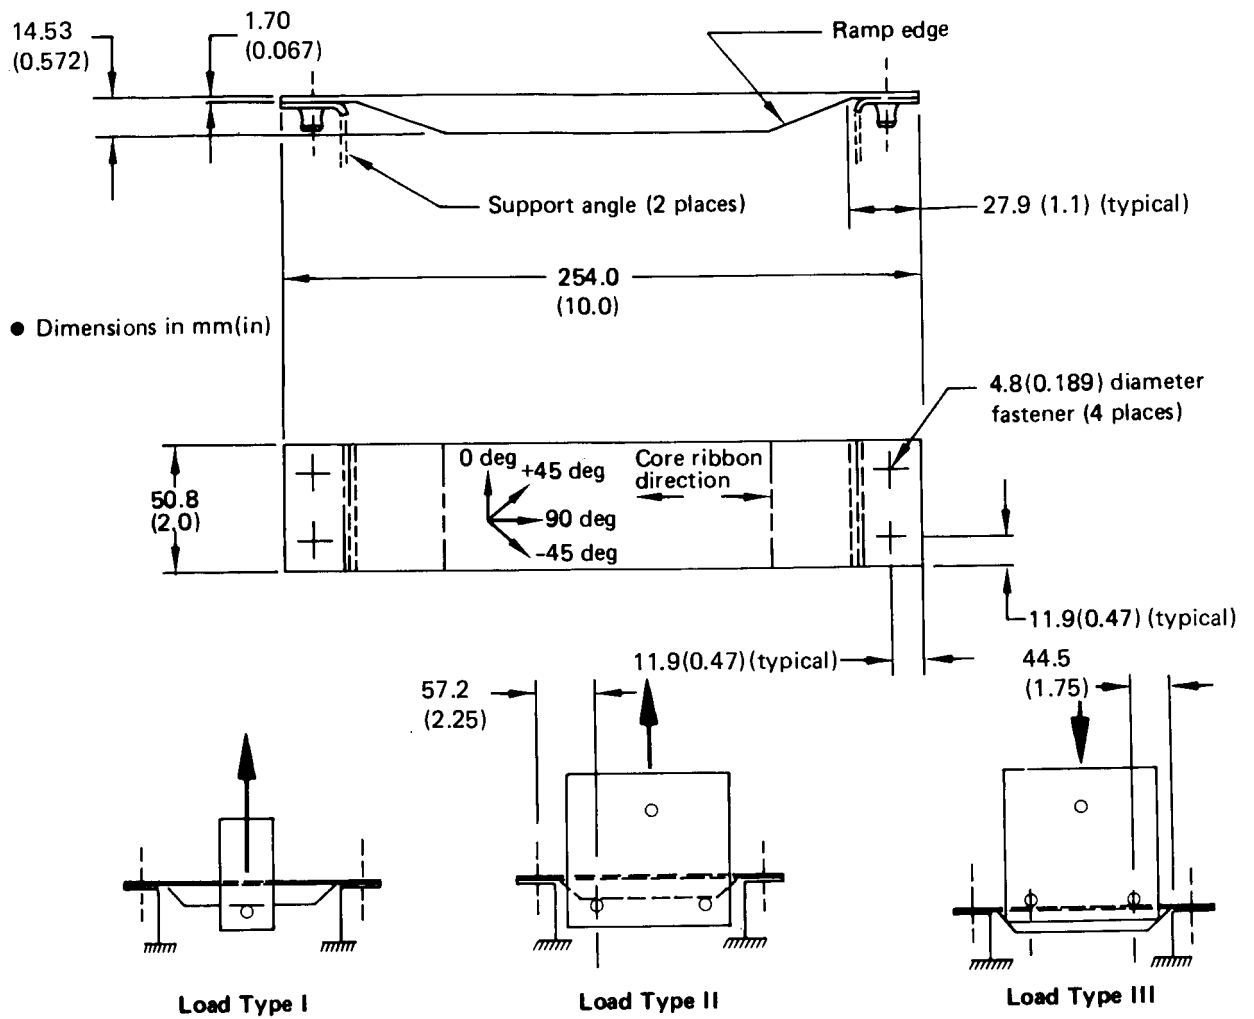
Panel Edge Shear and Bending Test Specimen Geometry (Test 12)
